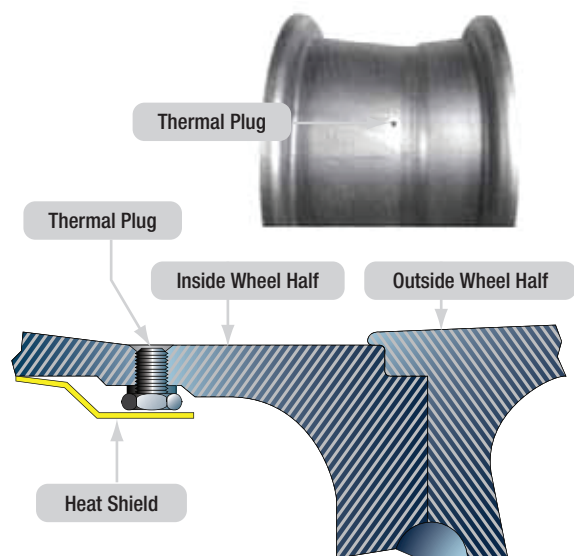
Heavy use of the aircraft brakes can cause tire air temperature and pressure to rise to a level resulting in explosion of the wheel assembly. To alleviate this, thermal plug(s) mounted in the inner wheel half of a high performance aircraft wheels are made with a fusible core that melts and releases the air from the tire before explosion.
